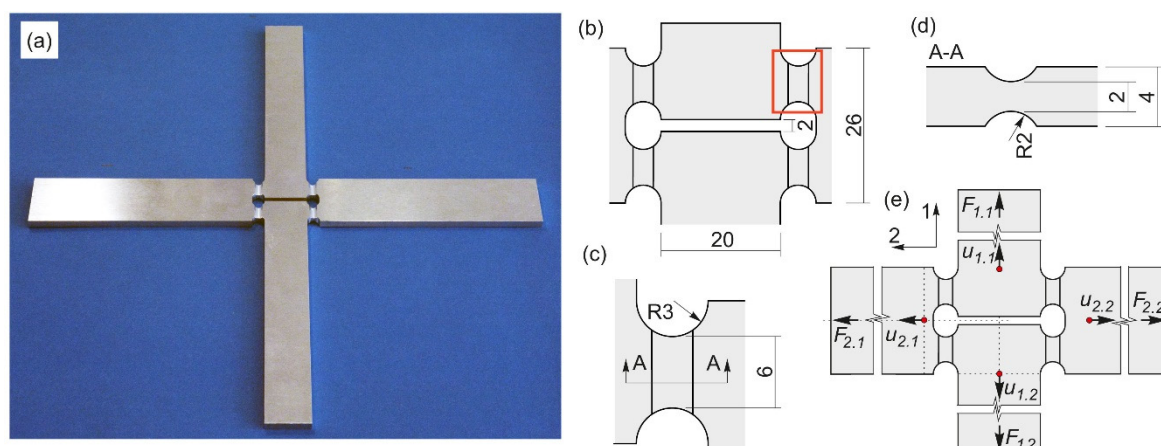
Geometry of the H-specimen: (a) photo, (b) central part, (c) detail notch, (d) cross-section, (e) notation.
